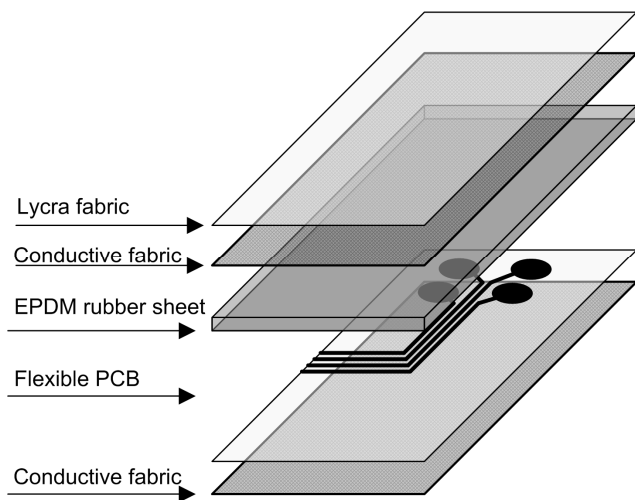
The exploded view of the insole sensor. The capacitive elements are made of conductive fabric, EPDM rubber and flexible PCB.
